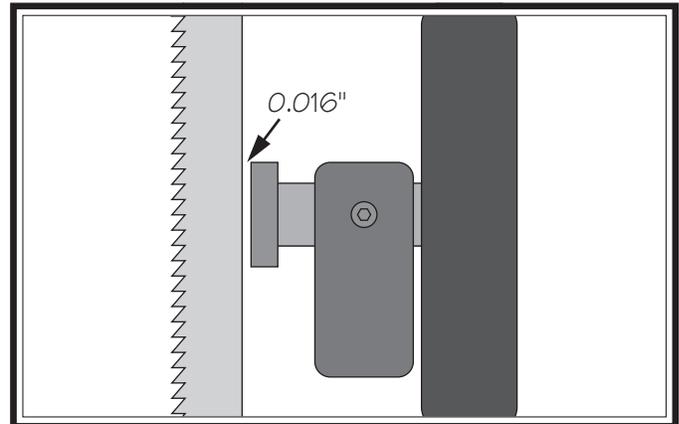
Bearing positioned approximately 0.016" away from back of blade.
